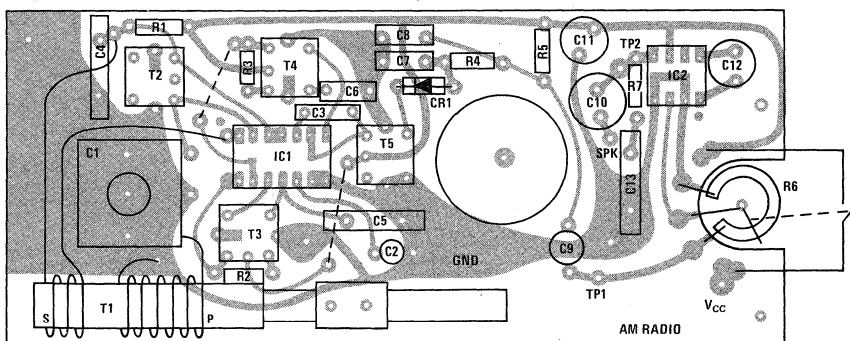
Typical Printed Circuit Board Radio Layout (Bottom View)
